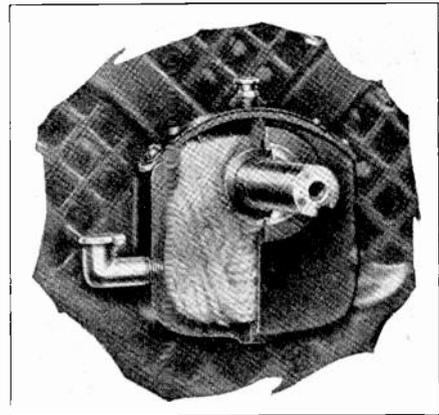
Bearing with cotton filled oil well, for wick oil feed action to shaft.
